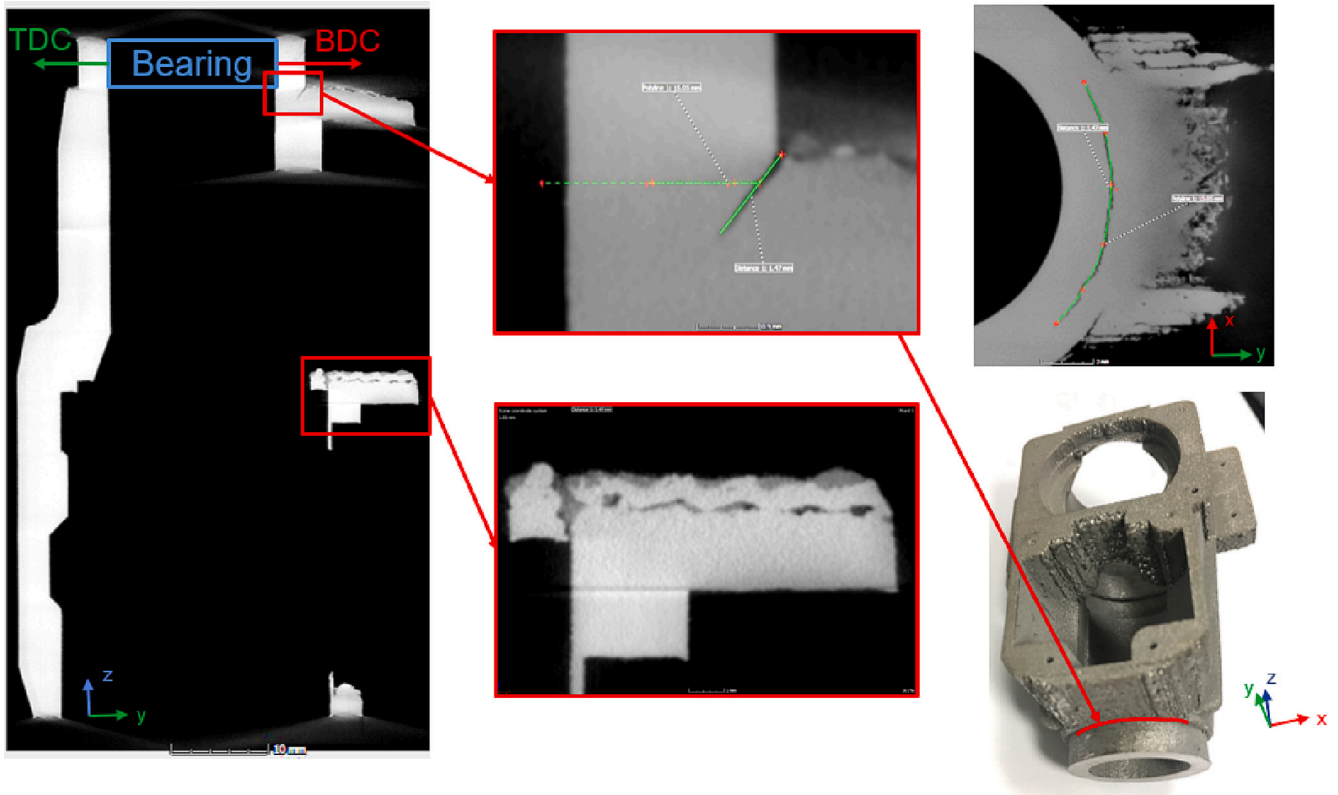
Crack defect in AM crankcase OEM design 1a.
